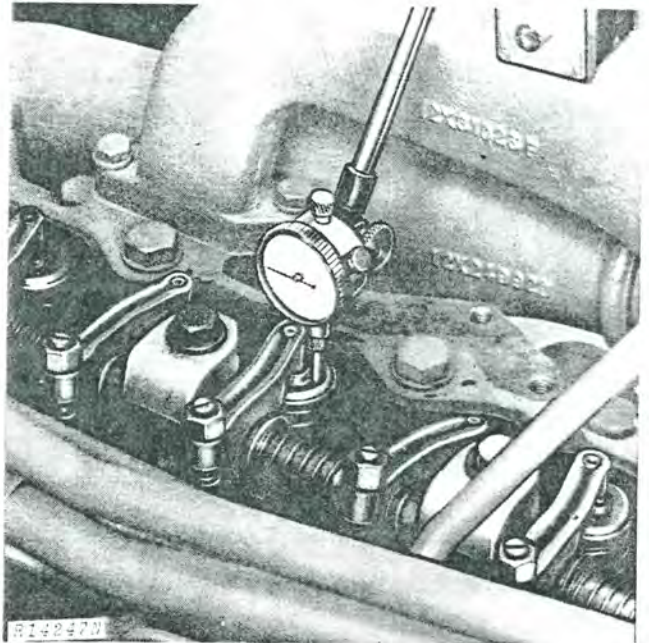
Checking Valve Lift (6-Cylinder shown)
